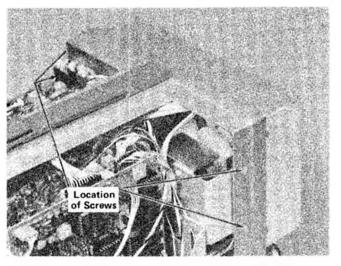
Location of screws holding Low Voltage sub-chassis.
